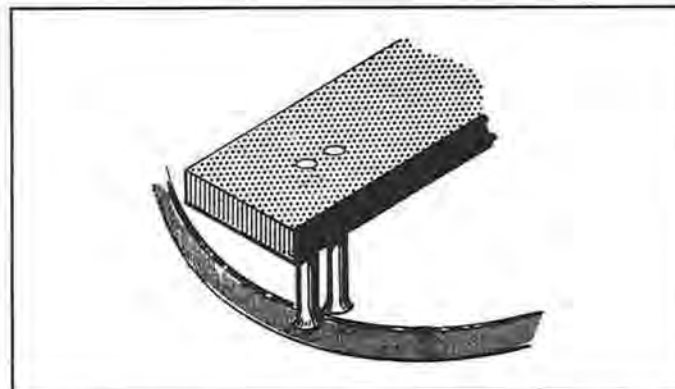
Bottom of the pins should not be burred as this could cause lower coils to catch if watch receives jar.
